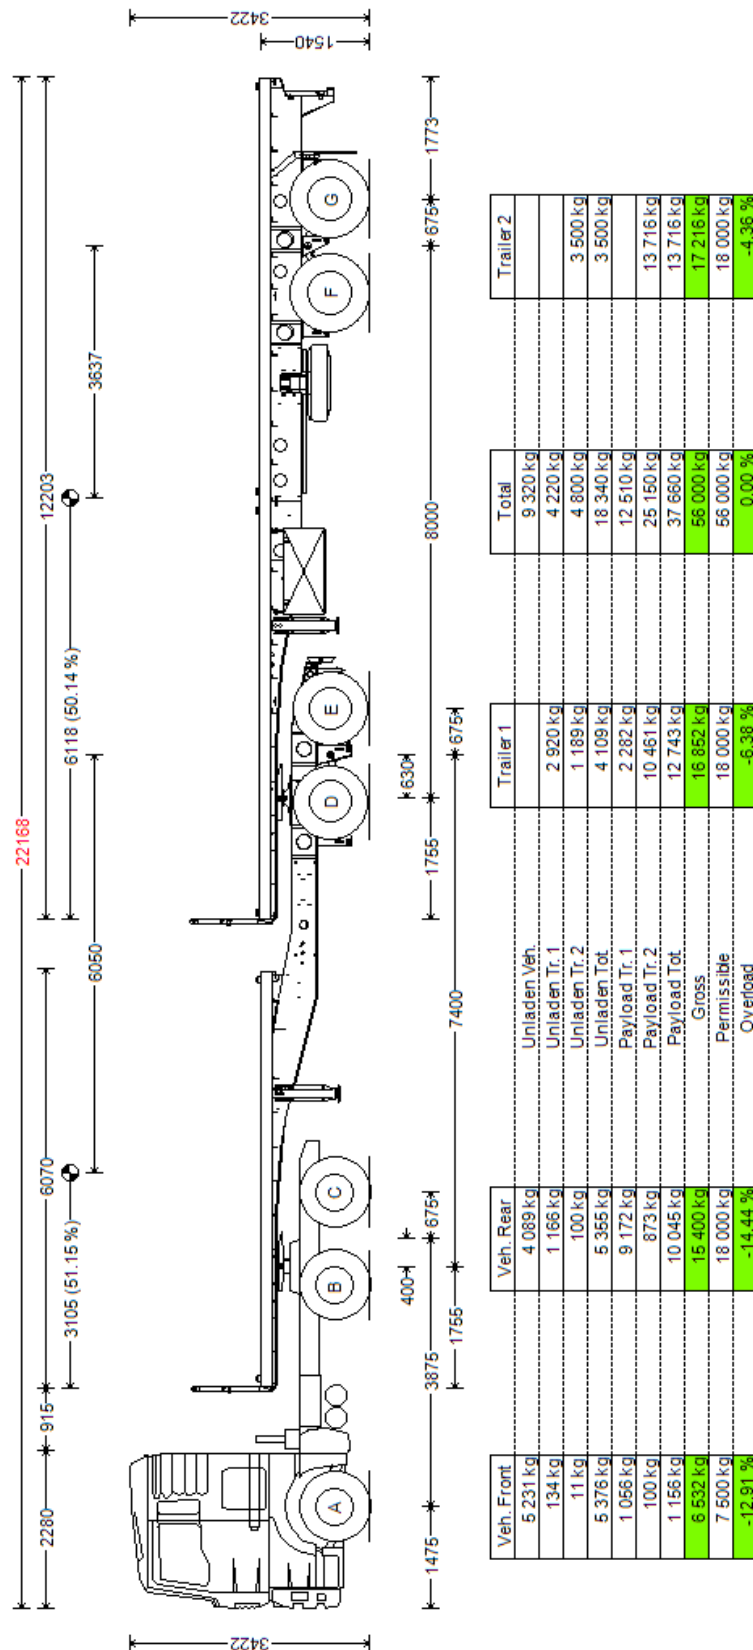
Layout dimensional drawing of the Skeletal B-double configuration
